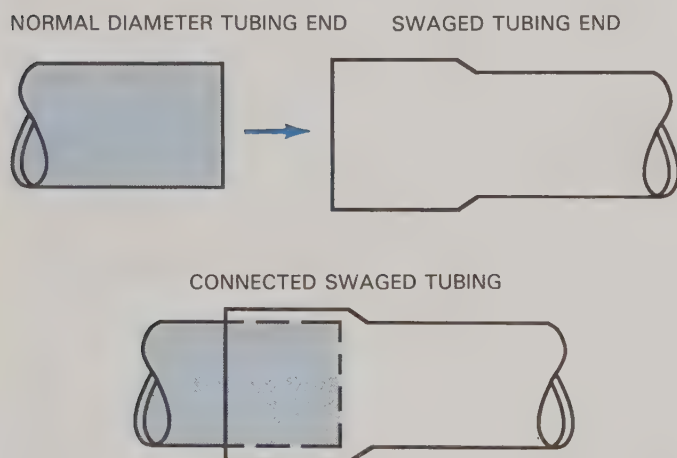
Swaging is a process used to join tubing by enlarging the diameter of one piece so that it forms a socket for another piece. The joint is then soldered or brazed for strength and leakproofing.
